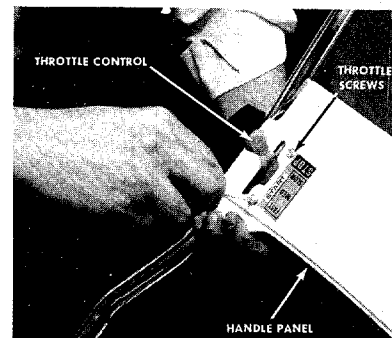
THROTTLE CONTROL ASSEMBLY
